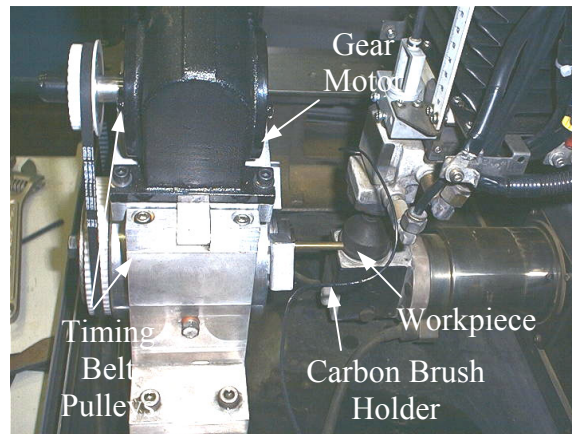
Side view of the hybrid bearing underwater spindle.
